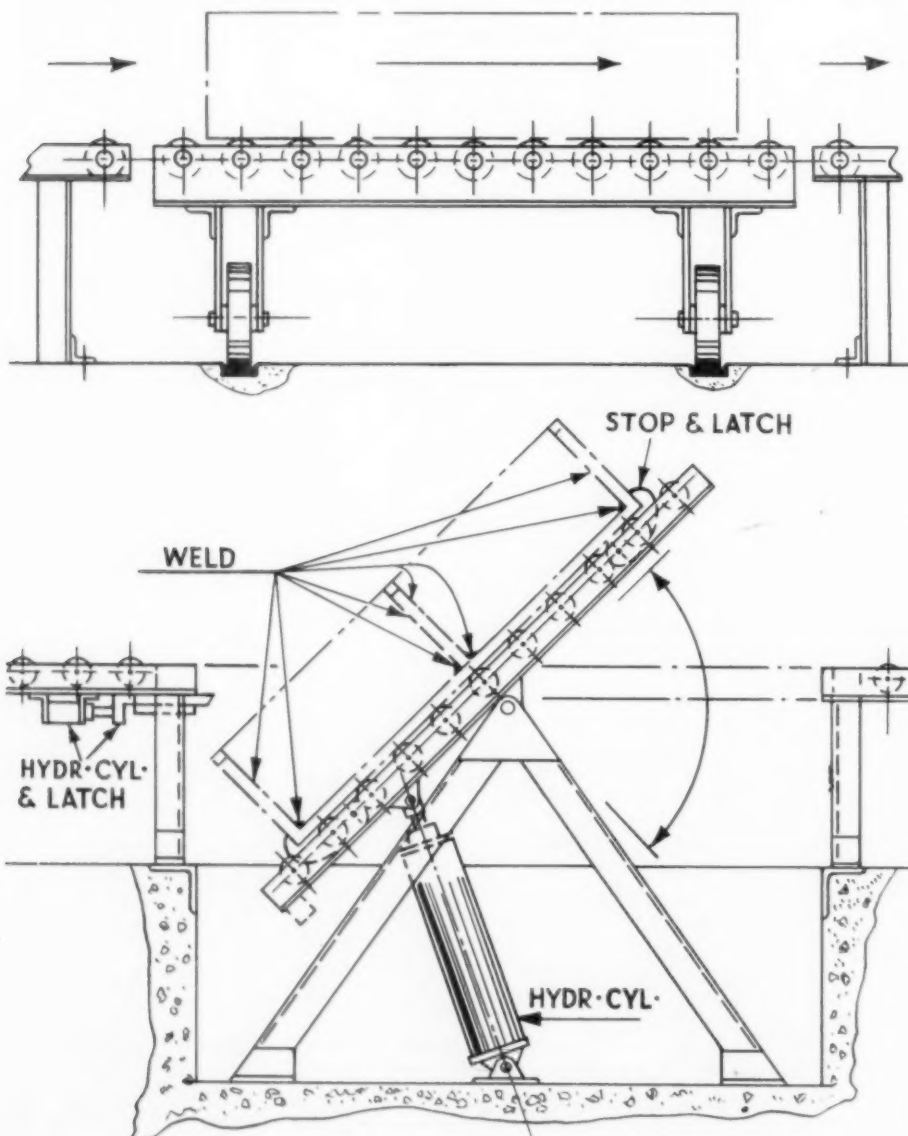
At left, above, shuttle carriage, used at Stas. 8 and 10, to transfer weldments from main assembly line to tilting fixtures (Sta. 9) shown in Fig. 11, left, below.
